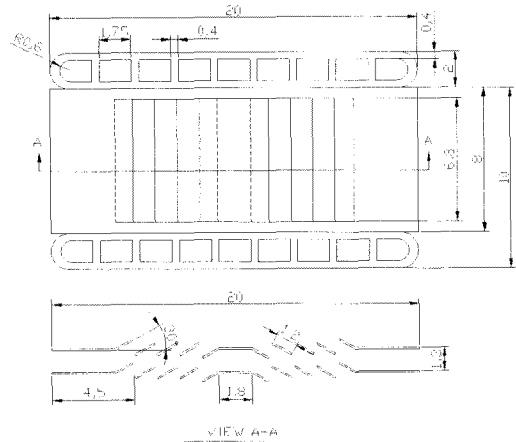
Louvered-fin and flat tube geometry of the brazed aluminum heat exchanger.
